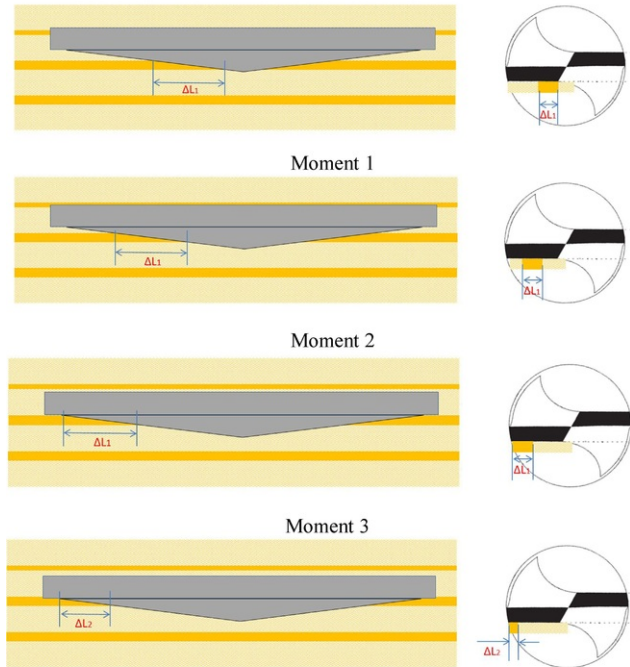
Schematic diagram showing 3 mm diameter drill tool cutting the aluminium entry material, copper layer and glass fibre resin layer simultaneously.
